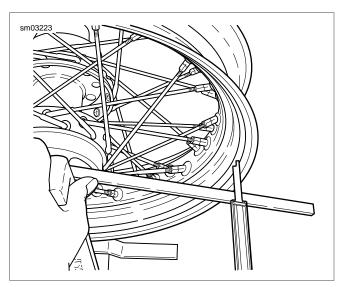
Checking Wheel Hub Offset Dimension (typical)
